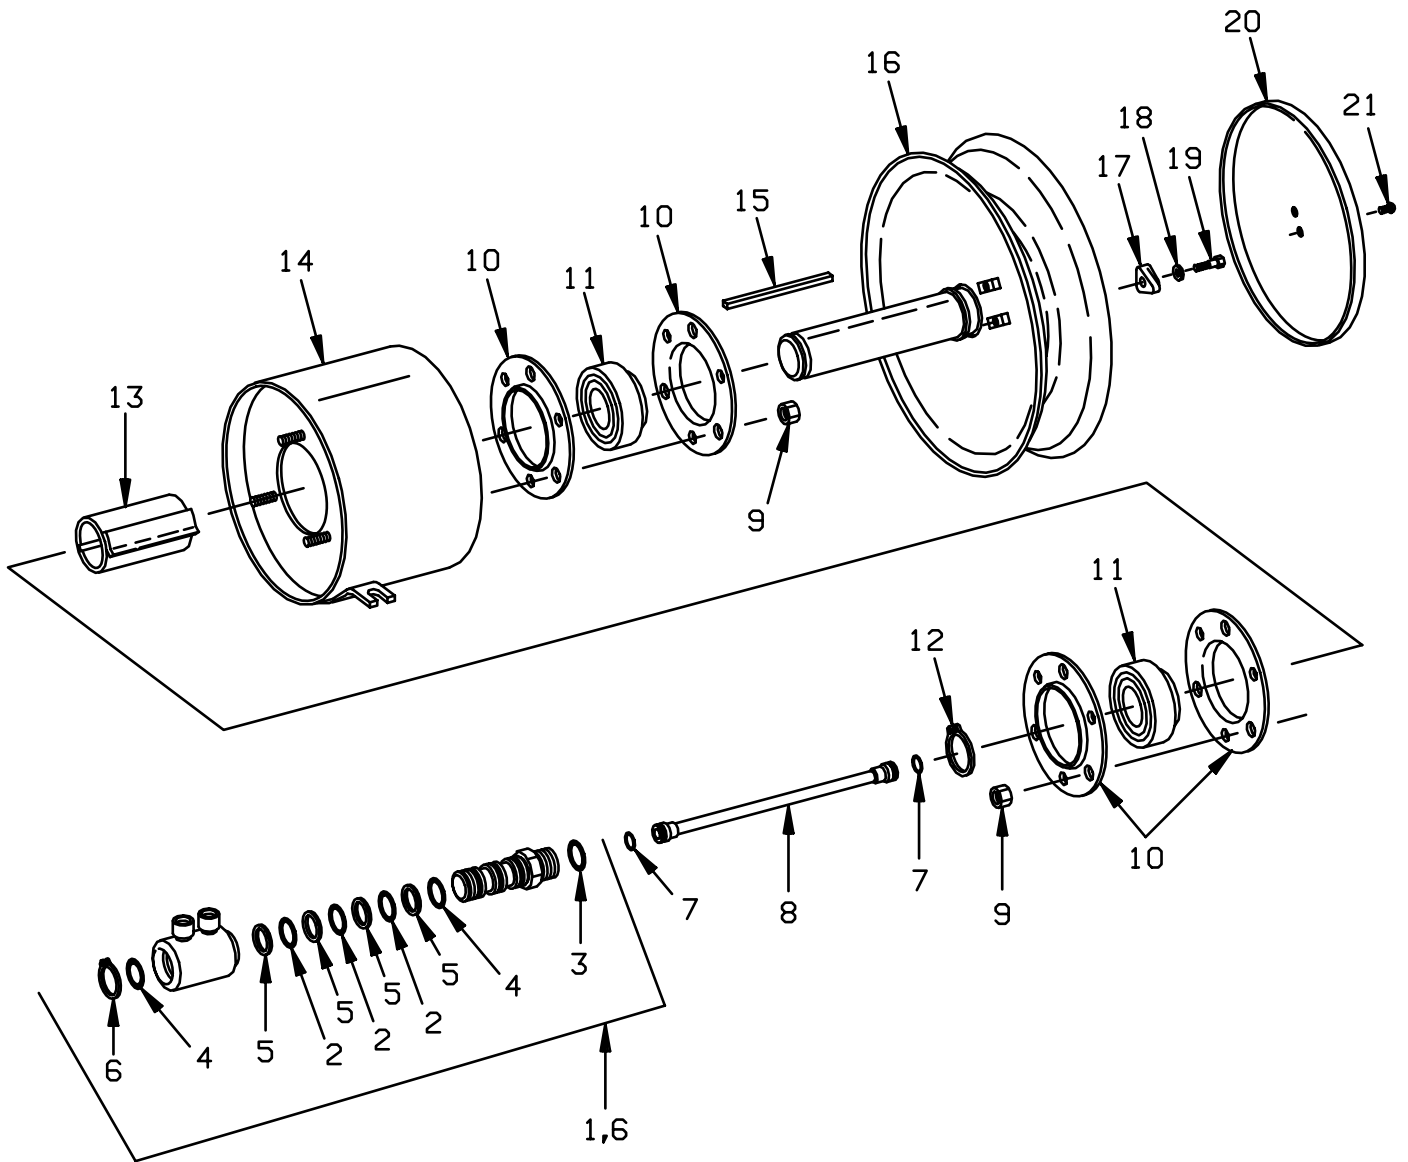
THREE STAGE MAST AUXILIARY HOSE ASSEMBLY
